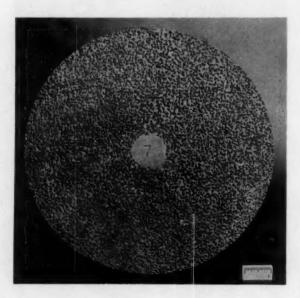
Cross-section of cellular aluminum mounting plate casting.
